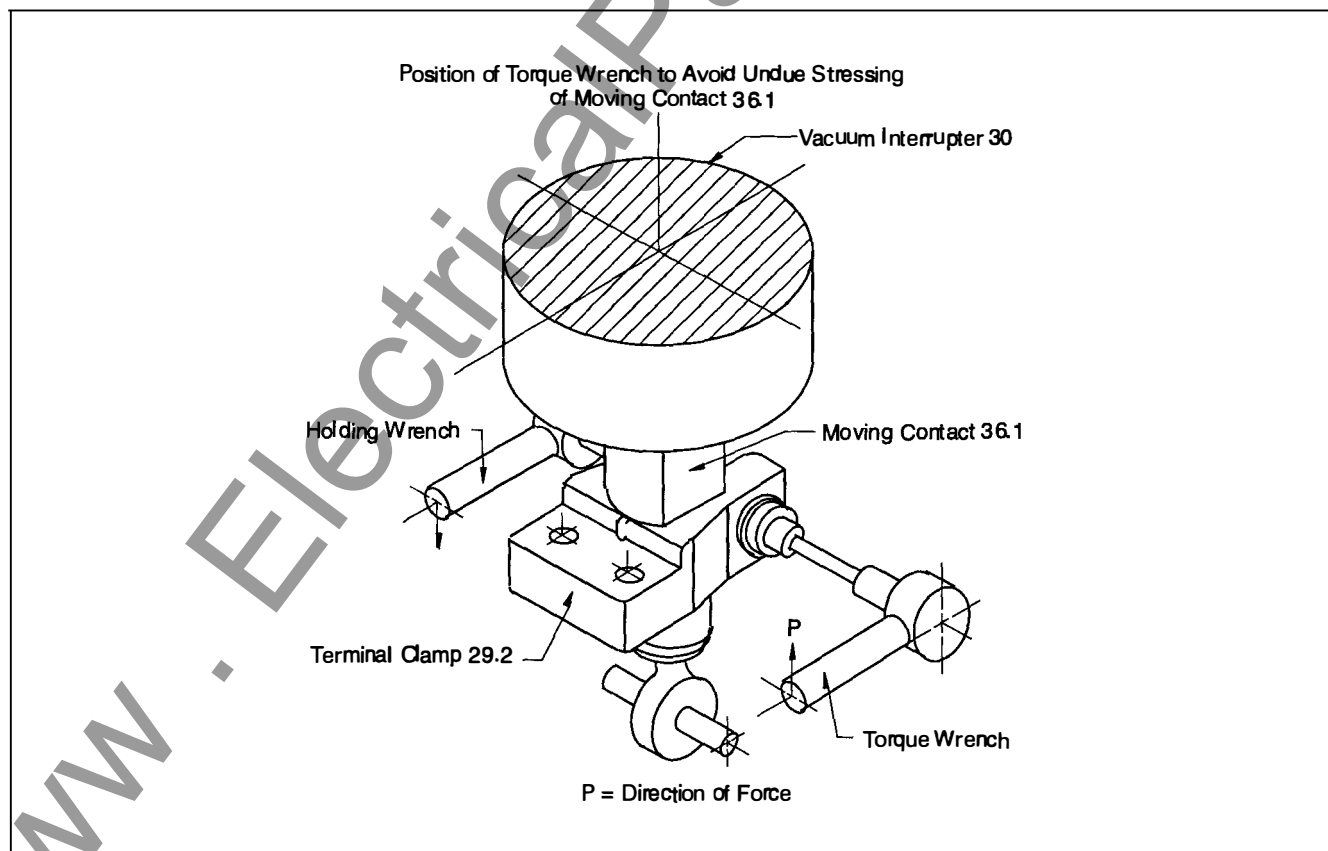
Technique for Tightening Vacuum Interrupter Terminal Clamp Hardware
